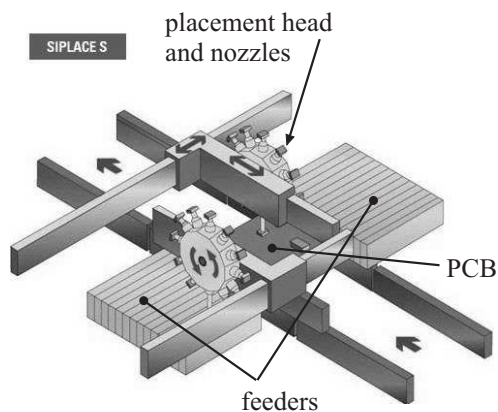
There are many multi-head gantry machines in Siplace-series of Siemens. (The image is taken from Siemens www-page.).
